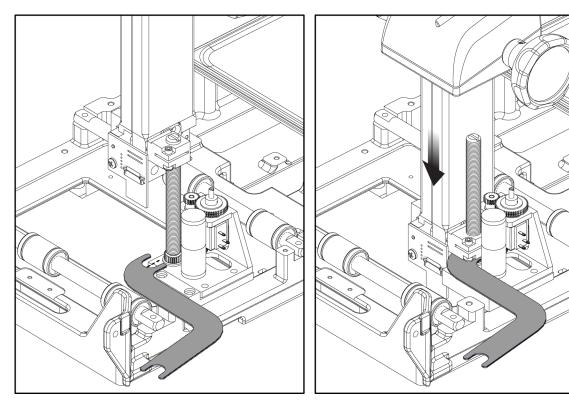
Moving Y-axis assembly to reach min endpoint with calibration tool
